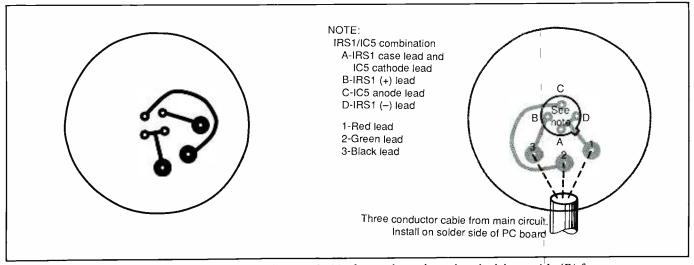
Actual-size etching-and-drilling guide (A) for probe pc board and wiring guide (B) for same.
